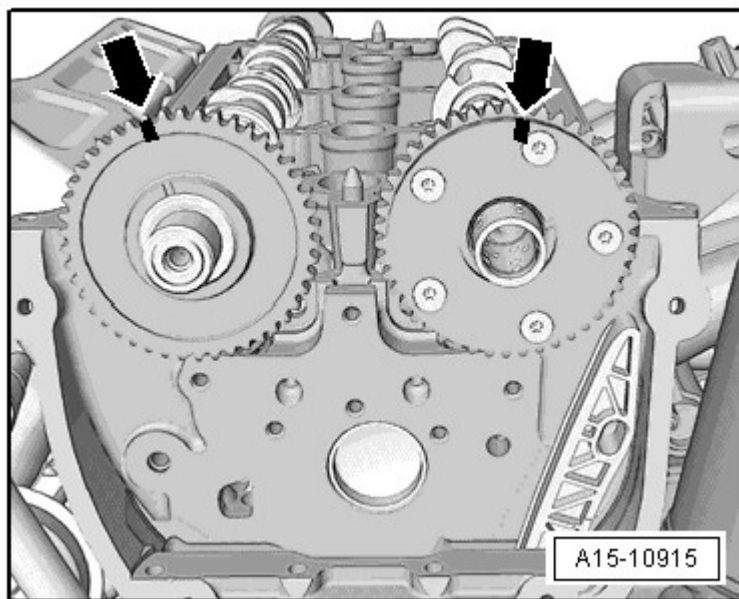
Identifying Camshafts Installed And Aligned In Cylinder Head
